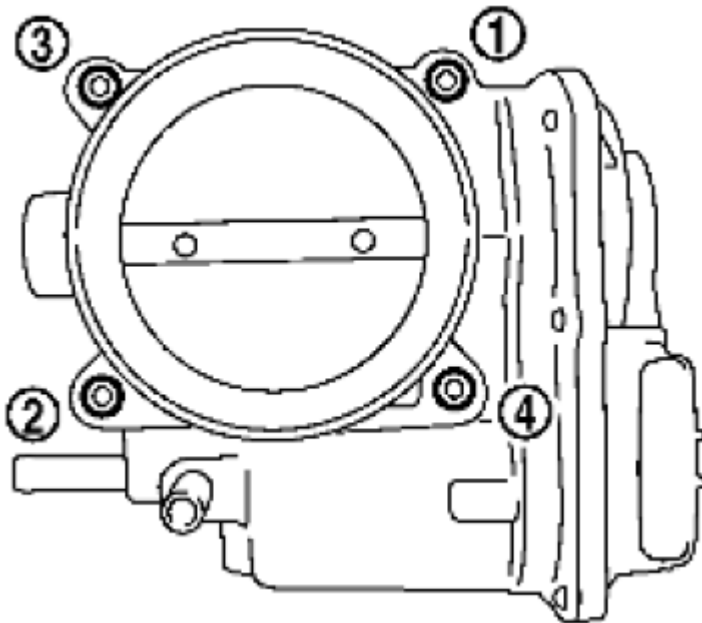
Identifying Electronic Throttle Control Actuator Bolts Loosen Sequence
